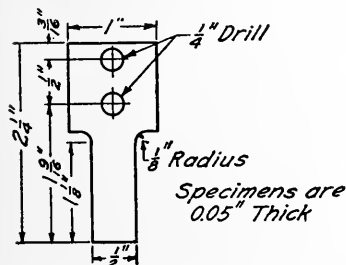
Specimen for fatigue tests of thin sheet metal.
